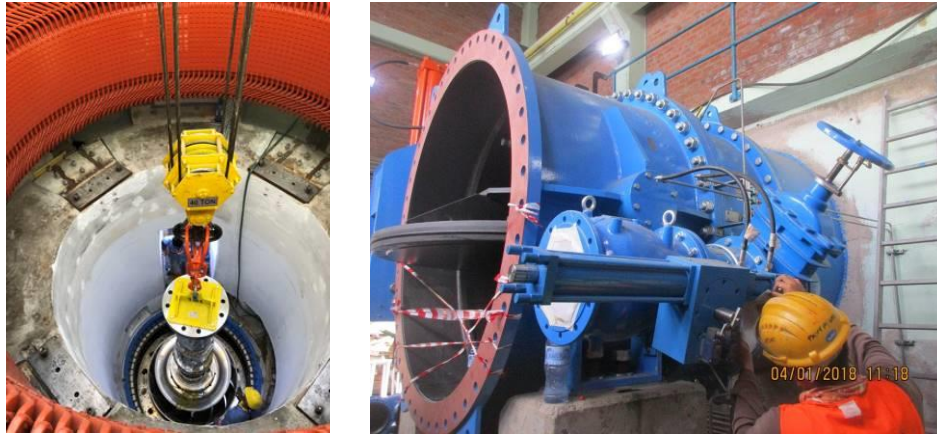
Left: Lowering of new turbine and shaft; Right: new penstock butterfly valve and upstream pipe
